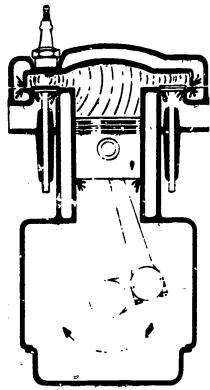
On the power stroke, energy can be lost through burned valves, worn piston rings, and a leaking head gasket.
